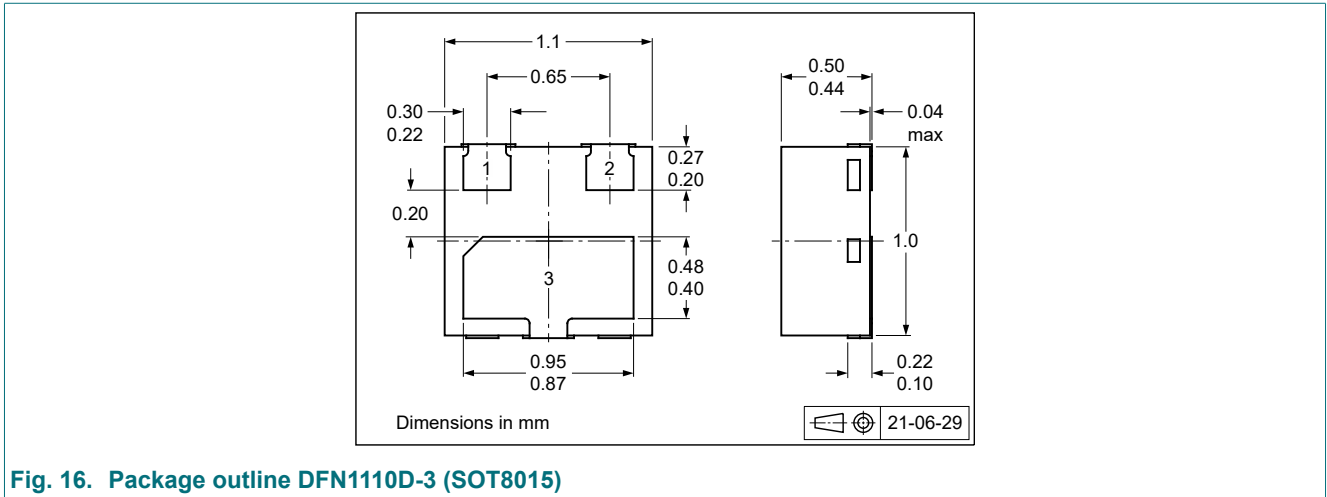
Package outline DFN1110D-3 (SOT8015)
